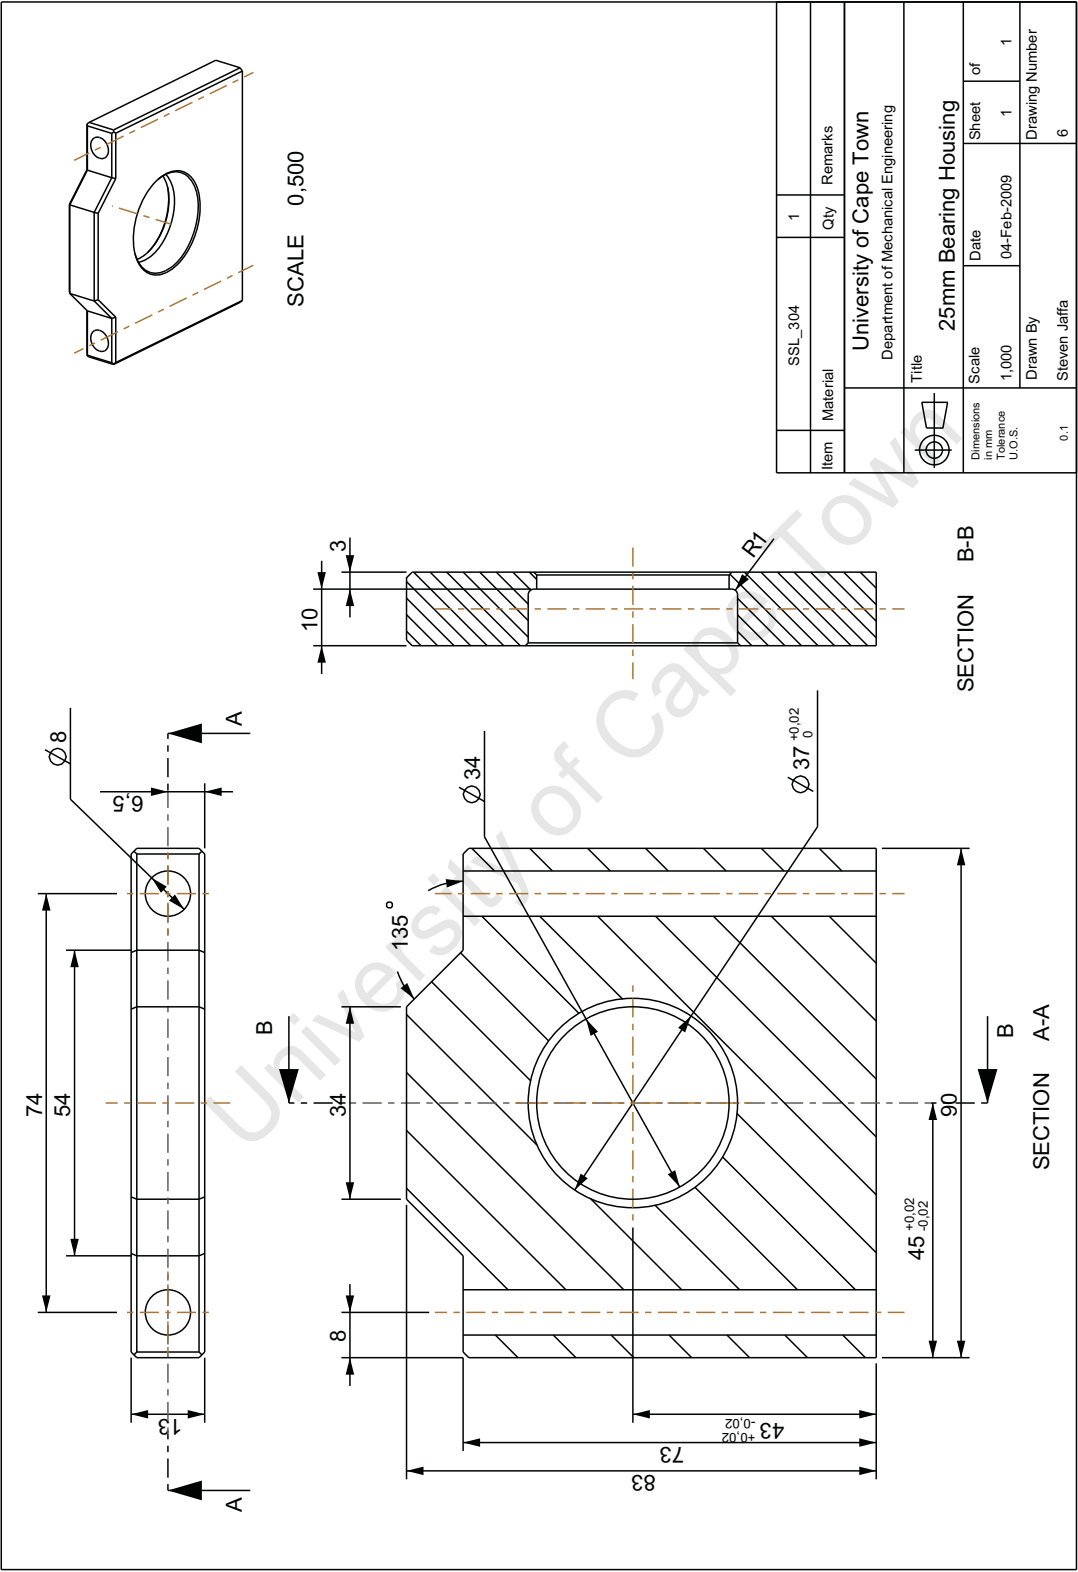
Manufacturing Drawing: 25mm Bearing Housing.
